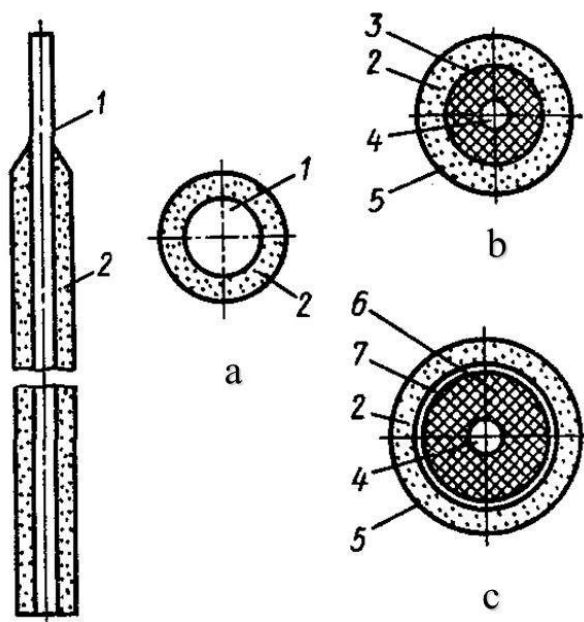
Electrodes for electric arc welding and cutting:
